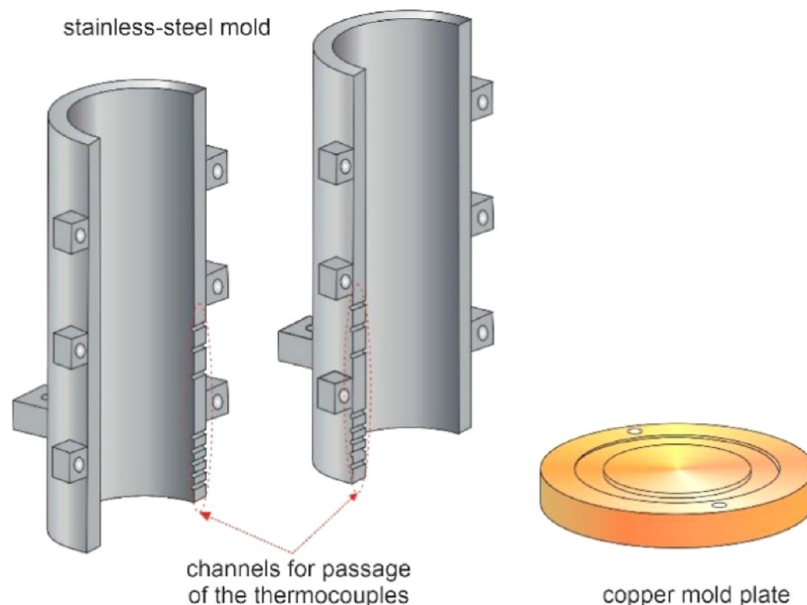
Stainless-steel mold and electrolytic Cu mold-plate.
